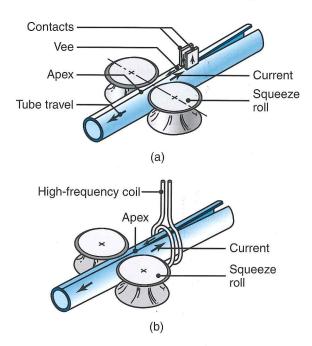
Two methods of high-frequency continuous butt welding of tubes.
